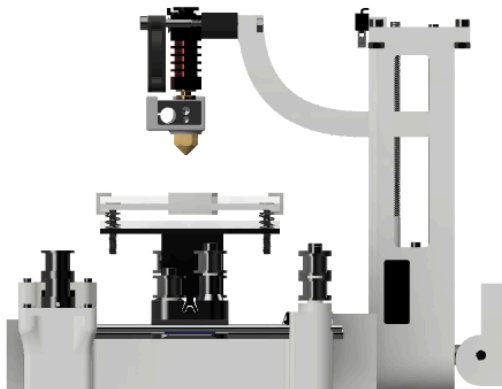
Full CAD Assembly of Linear Rod Design Right View
